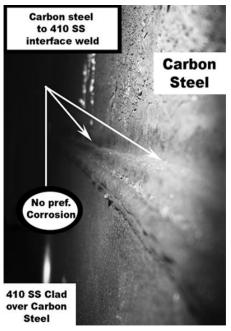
410 Stainless Steel Clad to Carbon Steel Interface Weld
